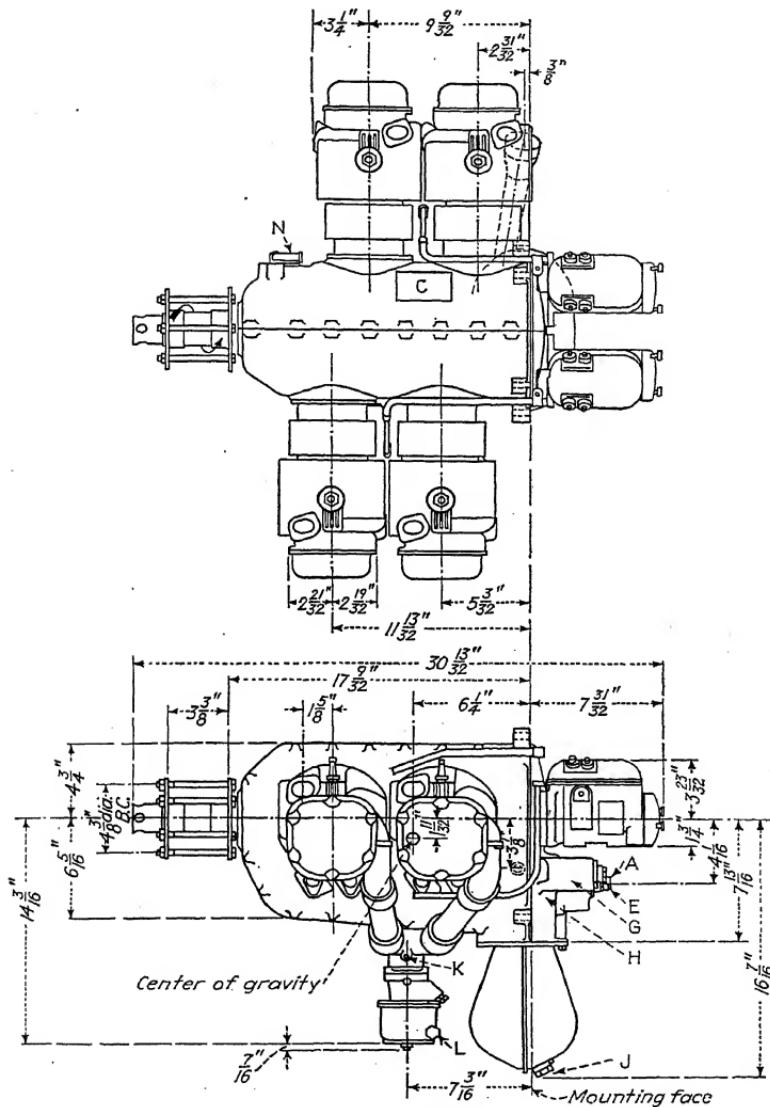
Mounting dimensions of model A-75, Series 3.
